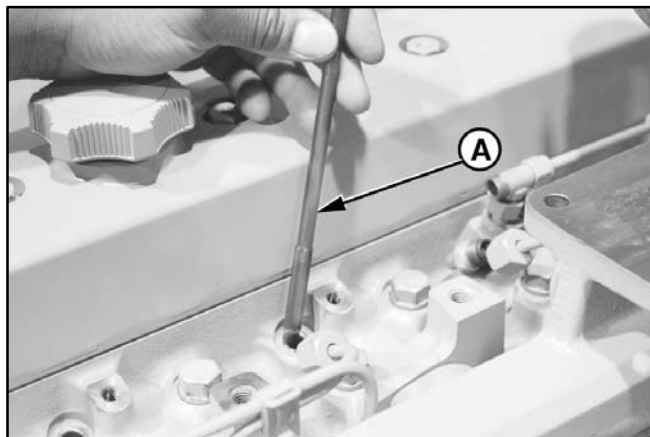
CLEANING INJECTION NOZZLE BORE
